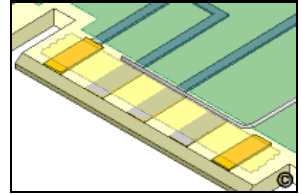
Apply Kapton Tape then solder a wire to the edge of the contacts needing plating.
